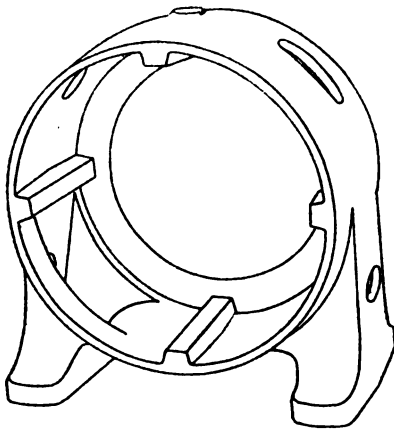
PERSPECTIVE VIEW OF FRAME CASTING IN THE ROUGH
